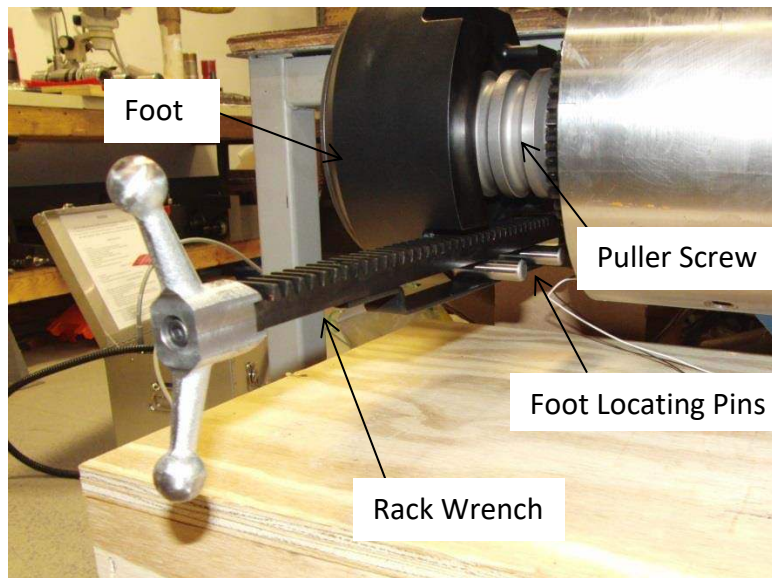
C – 6 O'clock Position Rack Wrench on Foot for Tensioner HT-5425, HT-7979, and HT-8133
